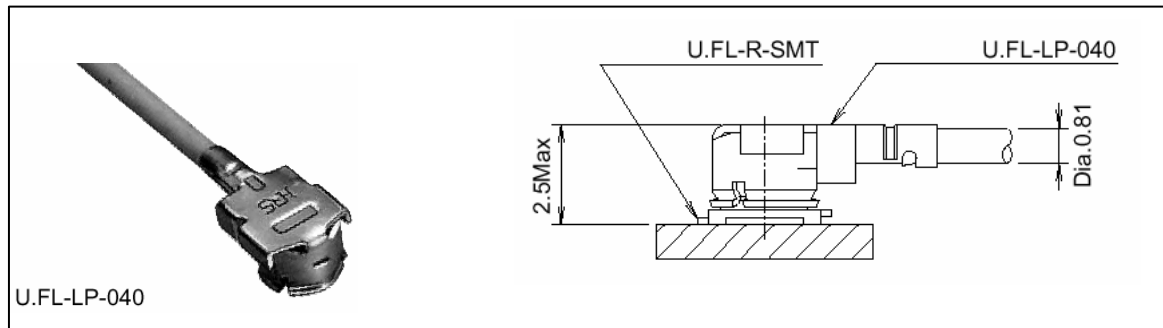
U.FL-R-SMT connector with U.FL-LP-040 plug
